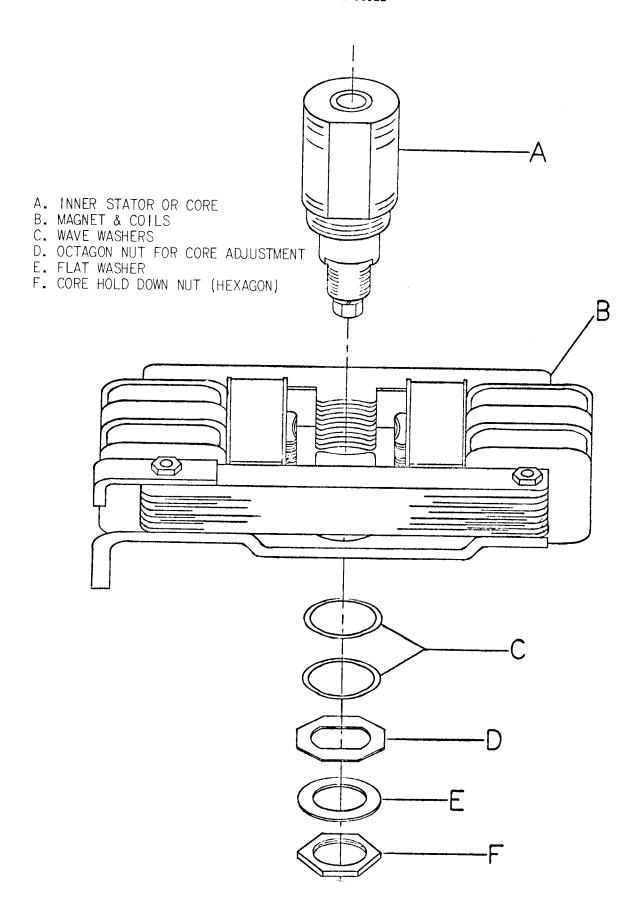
(0208A3583-0) Assembly Of Core And Associated Parts
